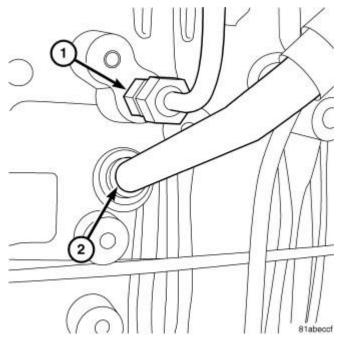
Turbocharger Oil Lines Courtesy of CHRYSLER LLC
